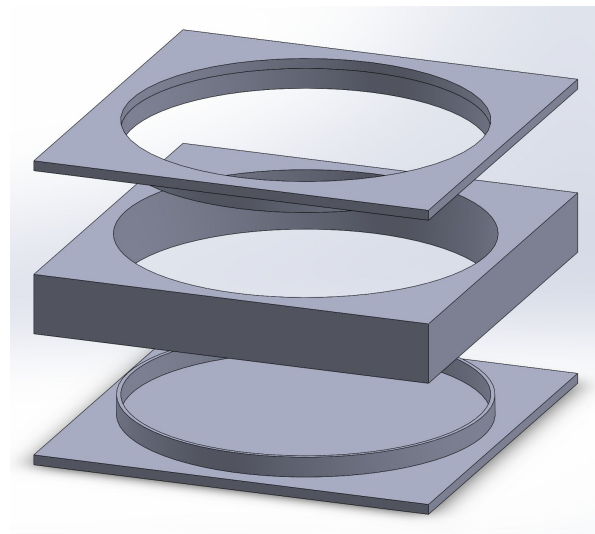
An exploded view of the mold shows how the three pieces will fit together during the layup process.
